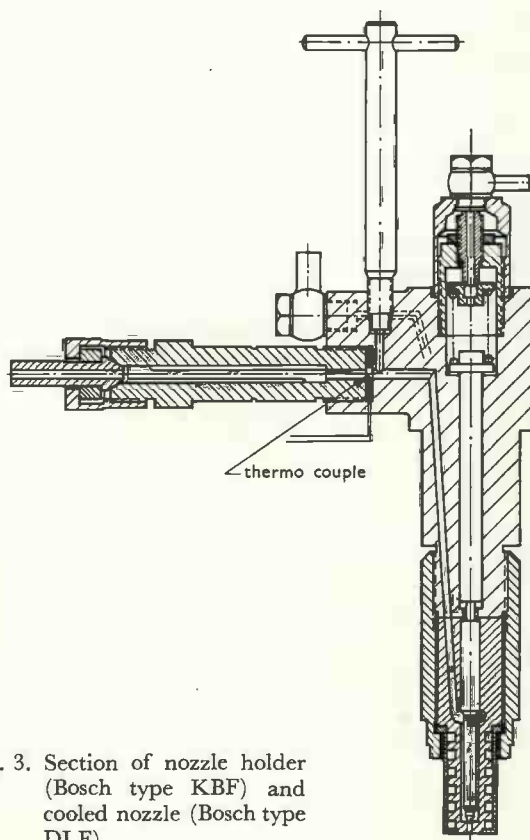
Section of nozzle holder (Bosch type KBF) and cooled nozzle (Bosch type DLF).
